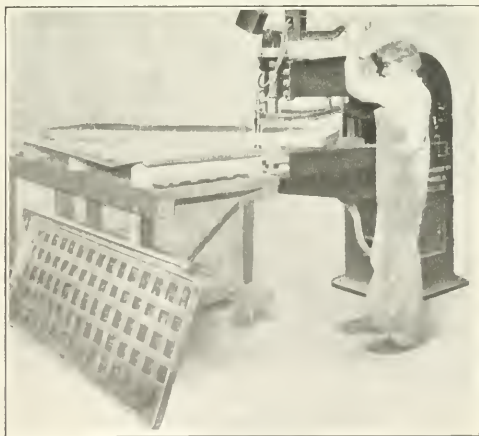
SPOT WELDER BUILDING LATTICED FRAMES
